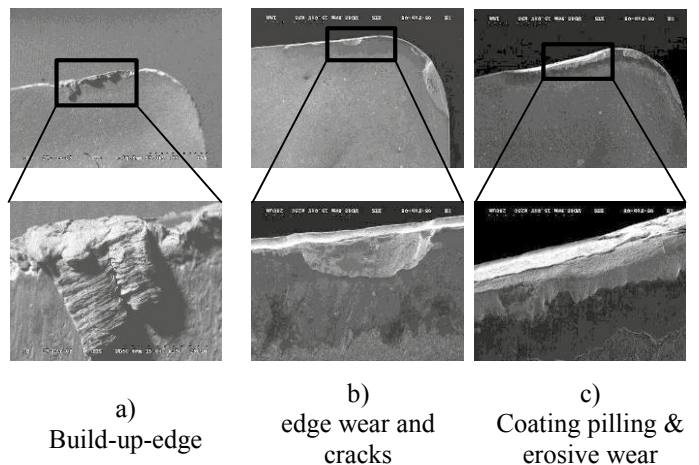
Some tool wear patterns observed on rake face during dry milling
